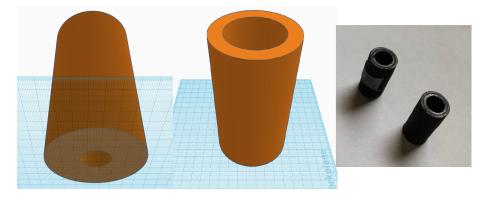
Left: Design connector with 3D printer and Right: coupling connector printed using 3D printer.
